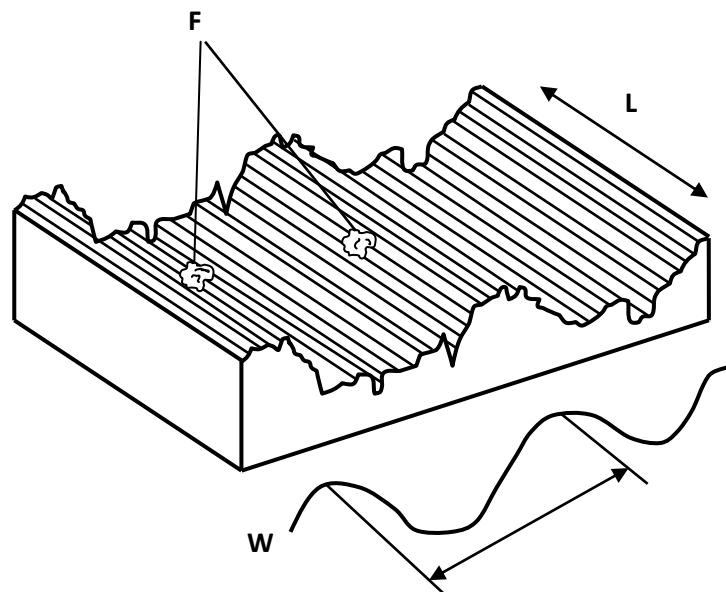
Typical surface produced after machining, showing its topography (F- flaws, L- lay, R- roughness and W- waviness) (Adapted from Griffiths, 2001)
